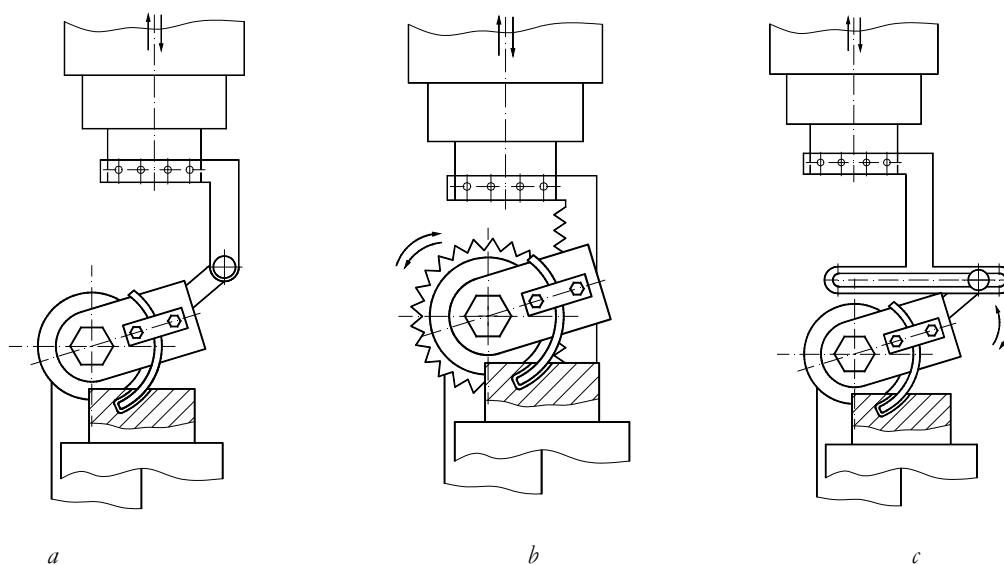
Three versions of the device for electrical discharge machining of curved holes: a – device with crank – connecting rod; b – device with rack and pinion; c – device with slider-crank mechanism.
